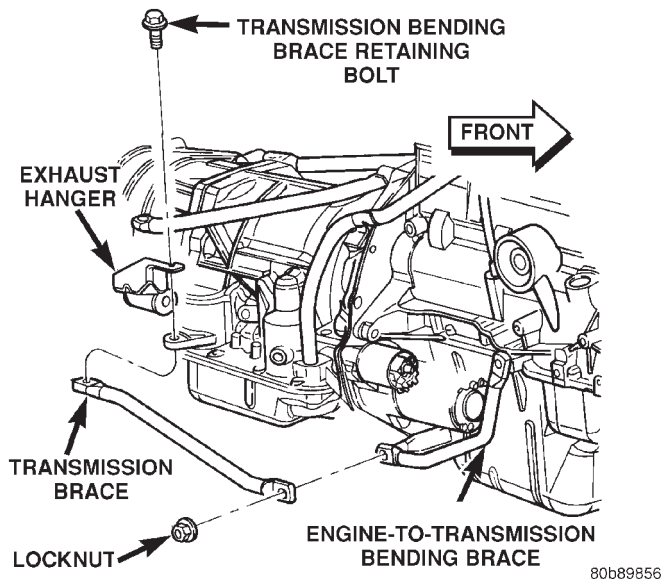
Transmission Bending Braces and Exhaust Hanger
